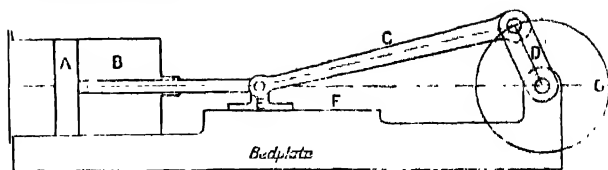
STEAM ENGINE THEORY. Action of piston in reciprocating engine.
